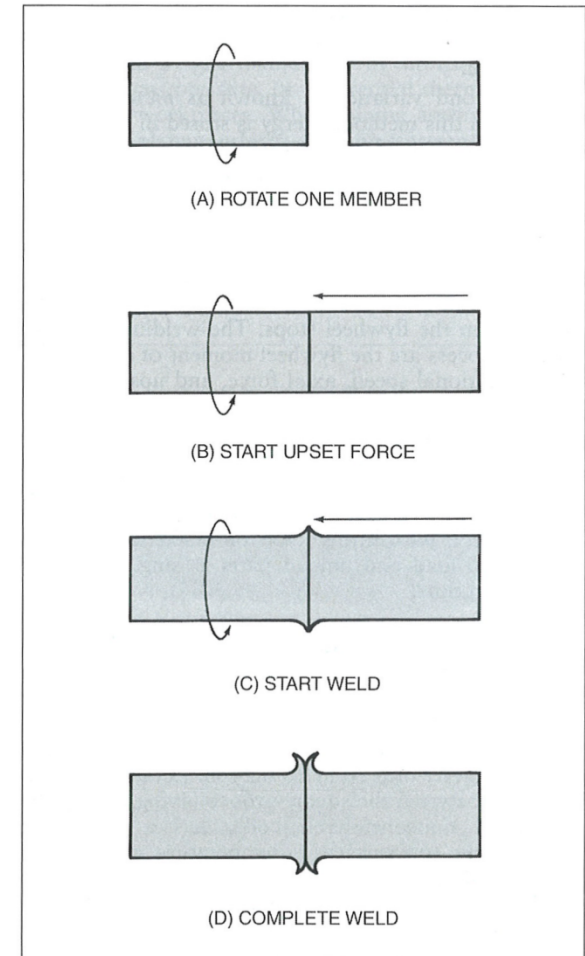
Schematic Illustration of Friction Welding
